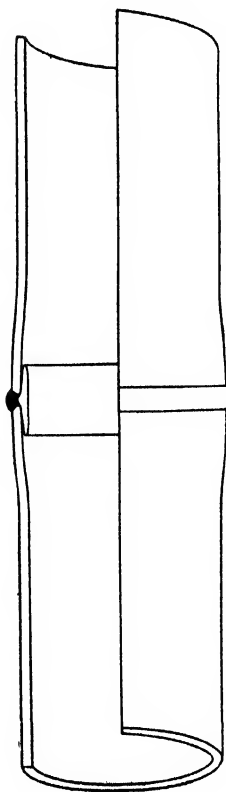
Double-expanded end for welding with chill ring.
